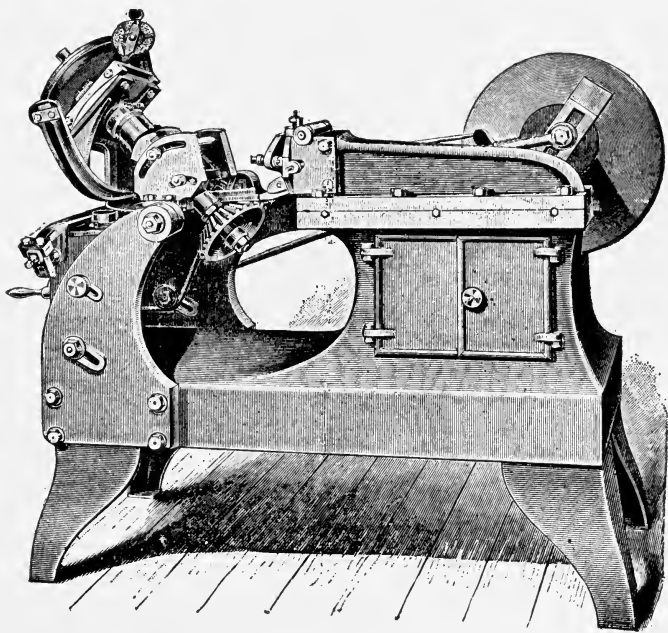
The original Bilgram bevel gear cutter, generating system.
